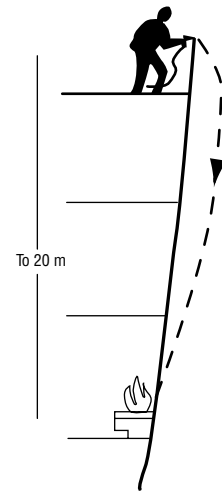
Typical travel distances for hot metal particles in welding and cutting.
